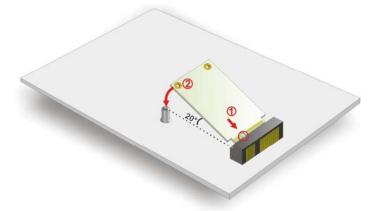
Insert the PCIe Mini Card into the Socket at an Angle
